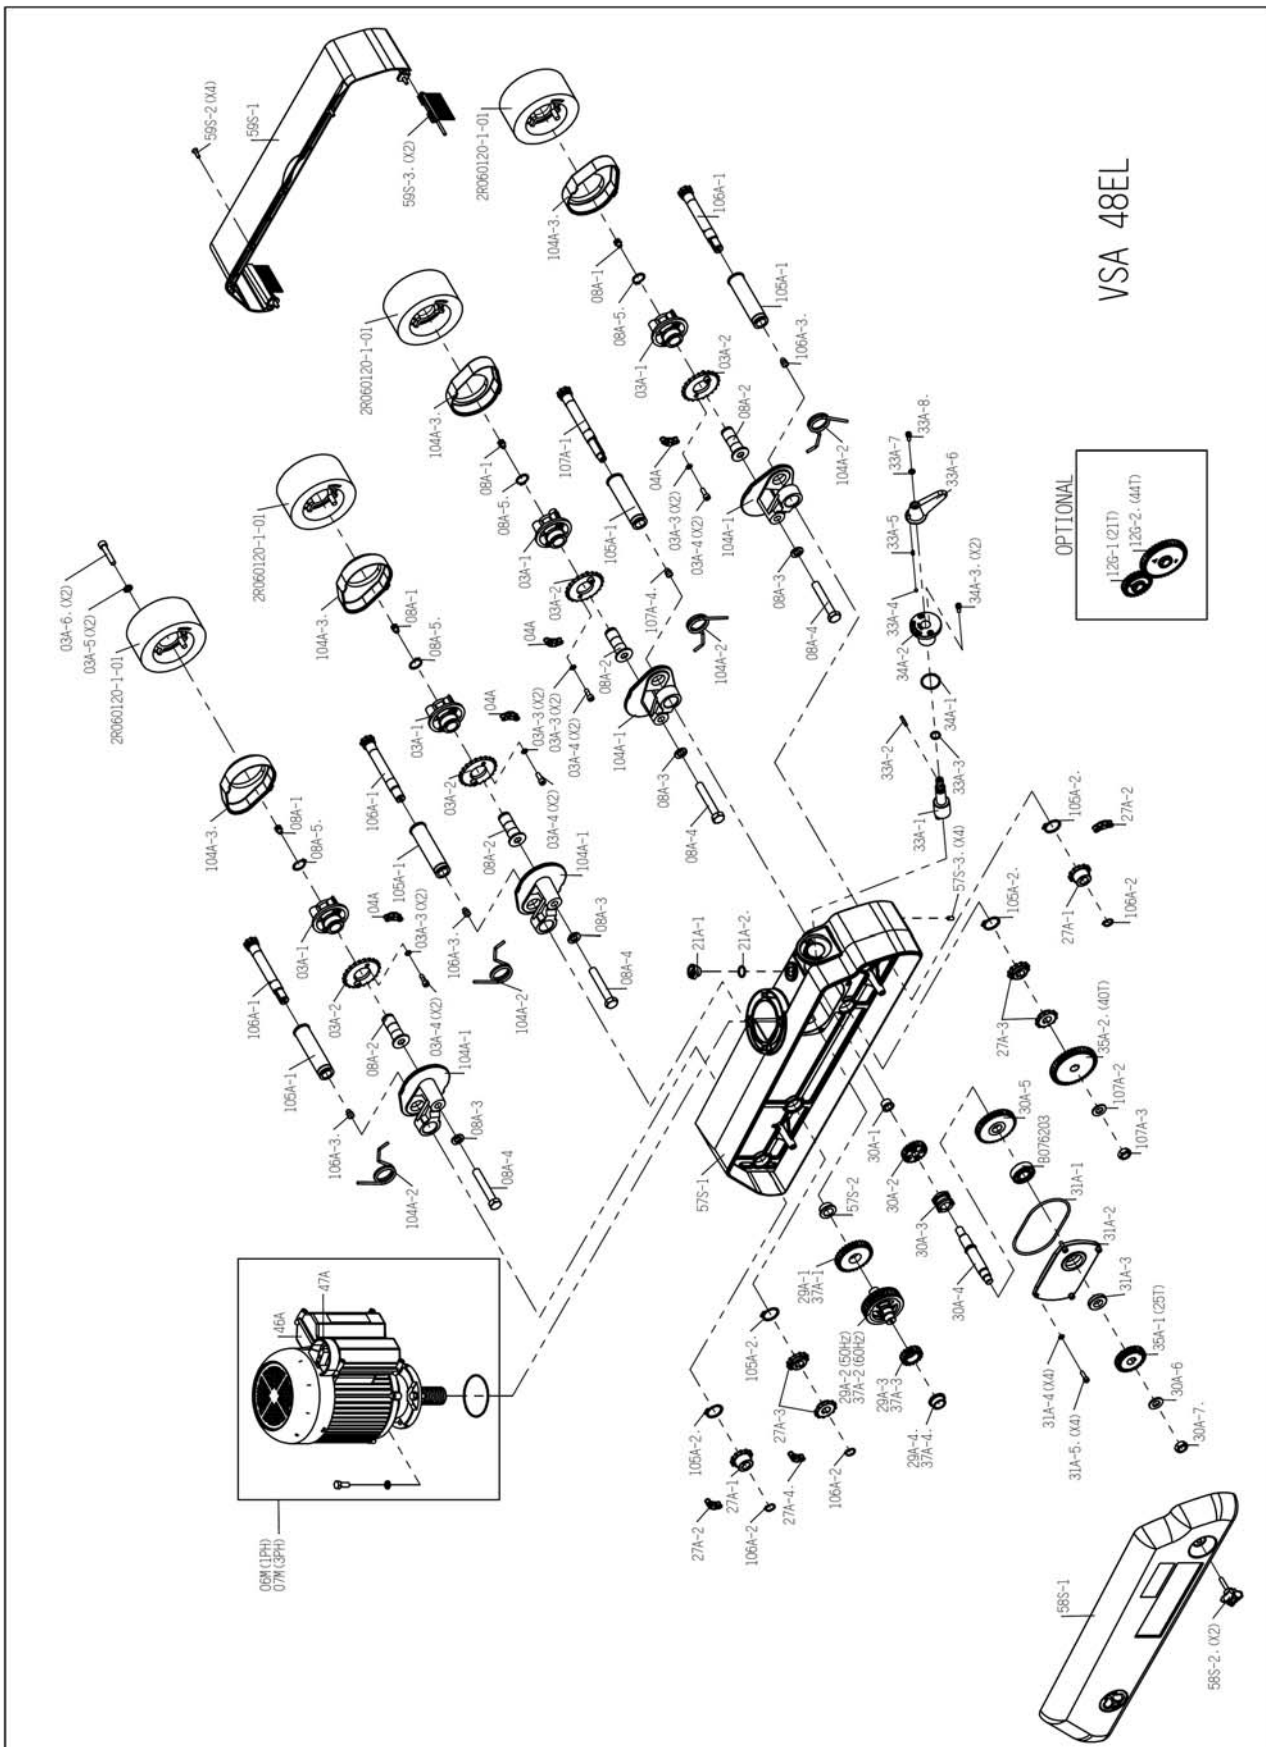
Spare parts drawing 1 - feed unit VSA 48 EL
